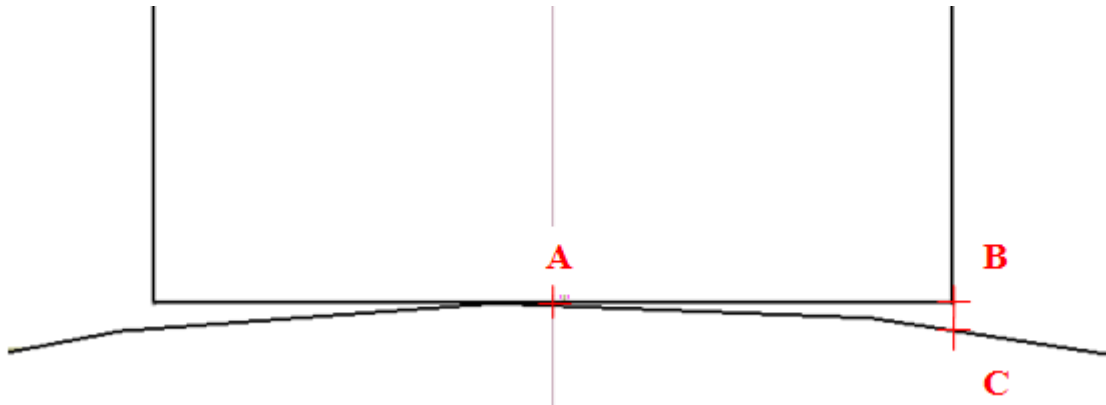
Sketch of the contact between the flat crevice former and the circular section of the larger scale fatigue specimen
